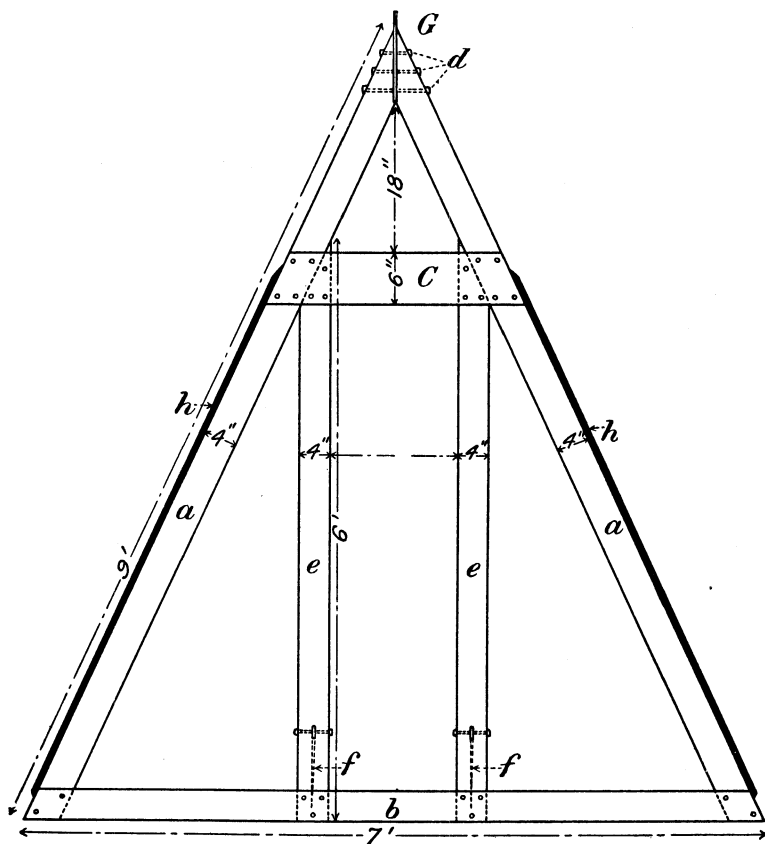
The V-shaped cotton-stalk cutter, top view.
